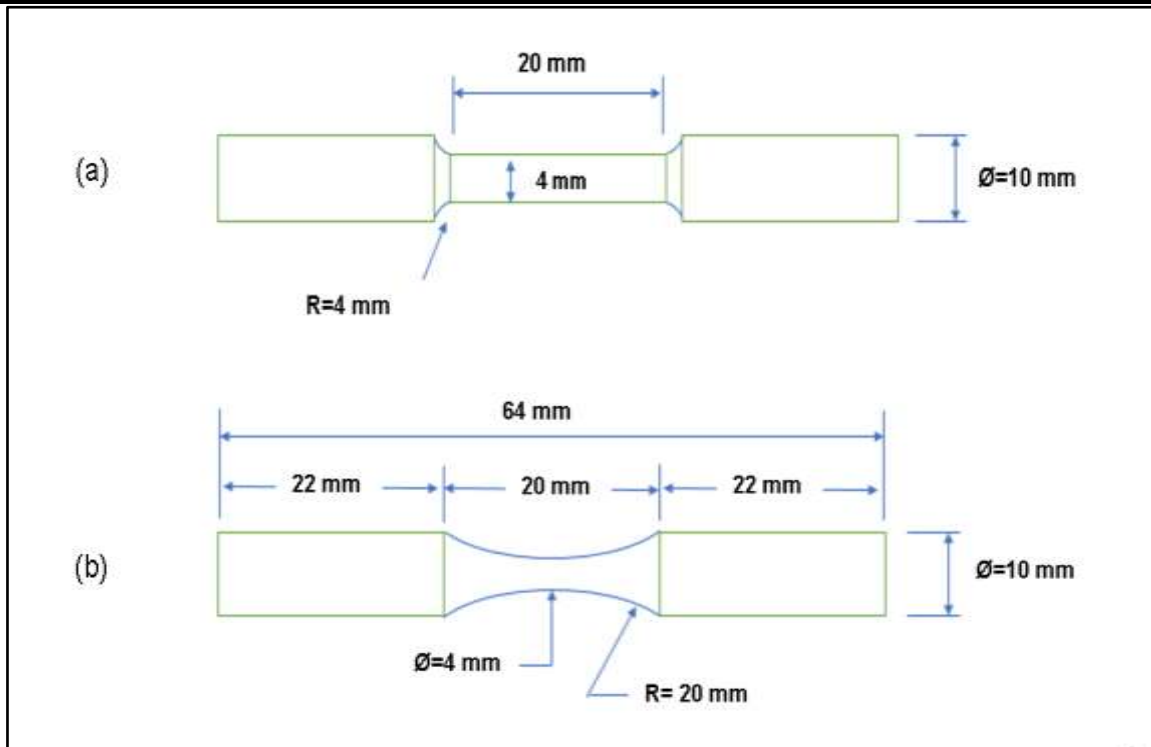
samples dimensions: a- Tensile test sample; b- Fatigue test sample
